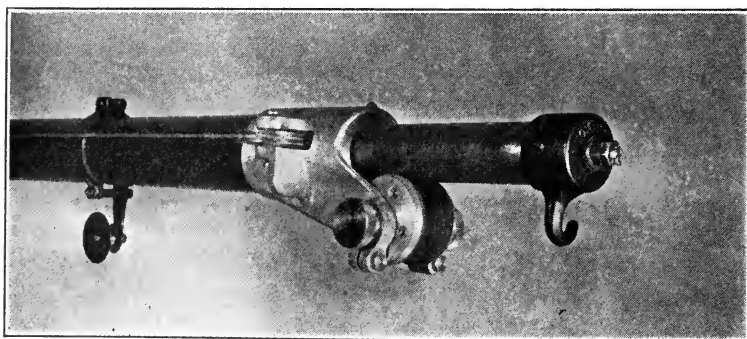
Extension tube carrier, Type M-R 103-103A.
